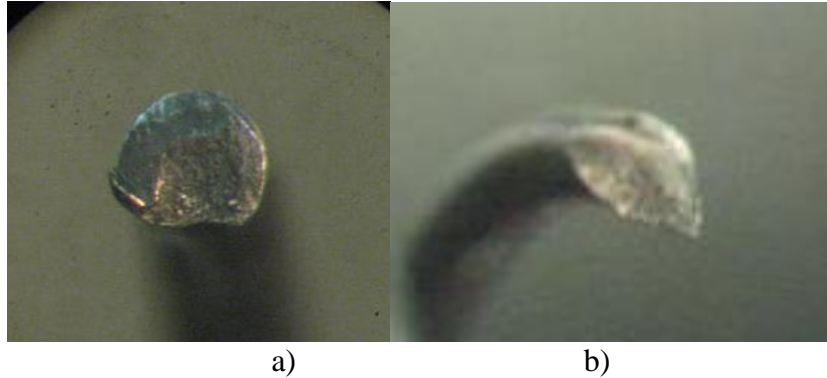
Spring end profile view: a) unbroken spring; b) broken spring
